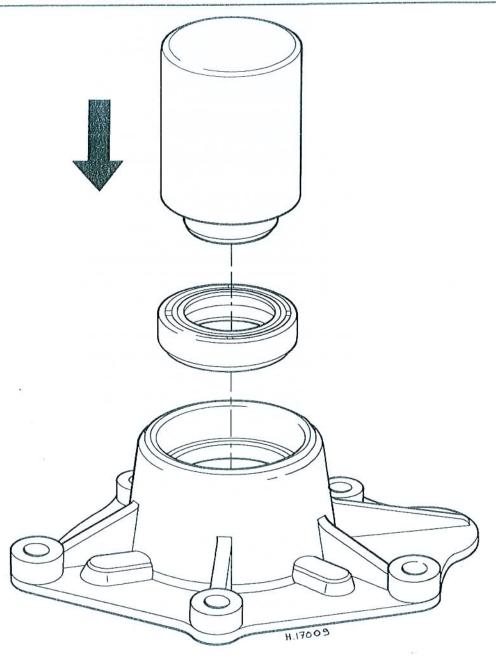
Fitting a new oil seal to the differential end cover (Sec 7)
